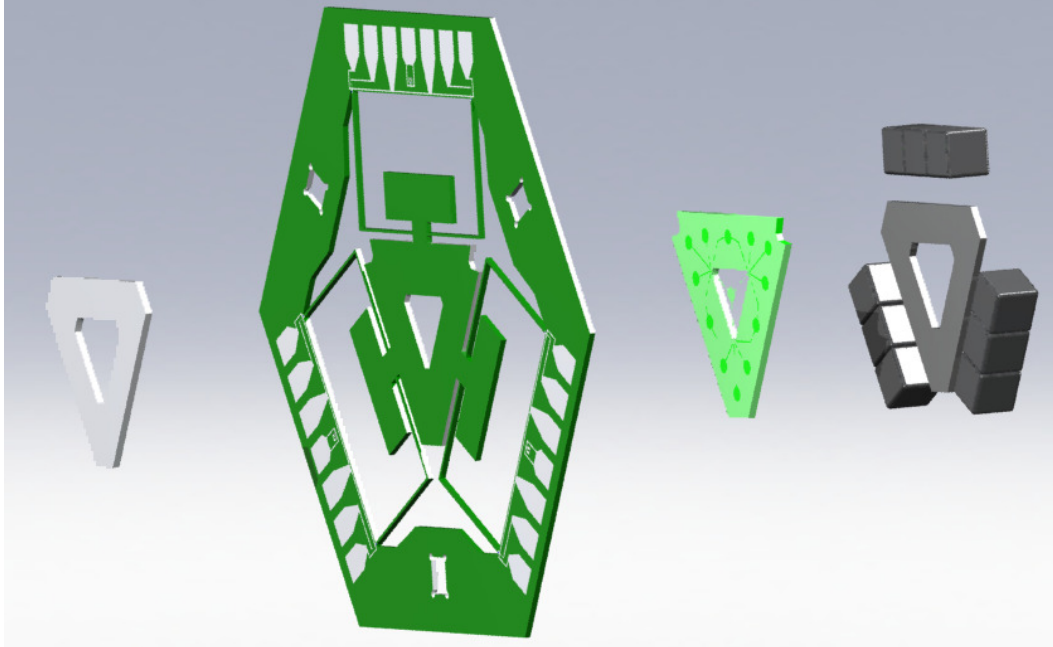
Exploded view of Hexflex-force sensor assembly.
